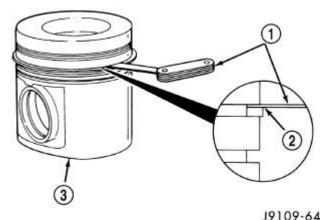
Intermediate And Oil Ring To Piston Groove Clearances Courtesy of CHRYSLER GROUP, LLC
